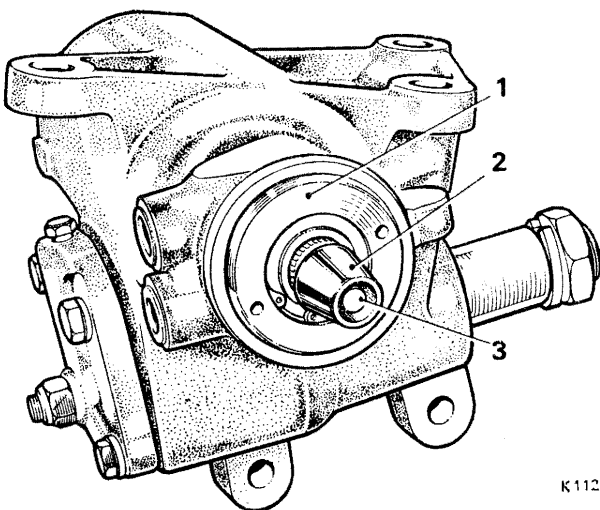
INSTALLING ADJUSTER PLUG ASSEMBLY
